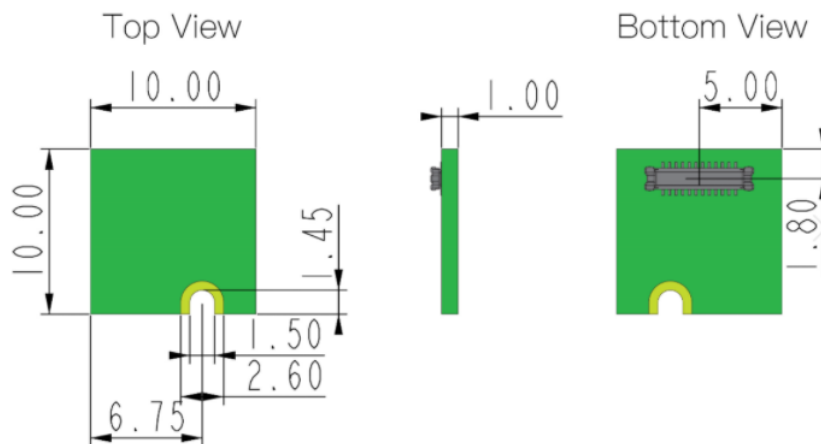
RAK12019 WisBlock UV Sensor Dimensions
